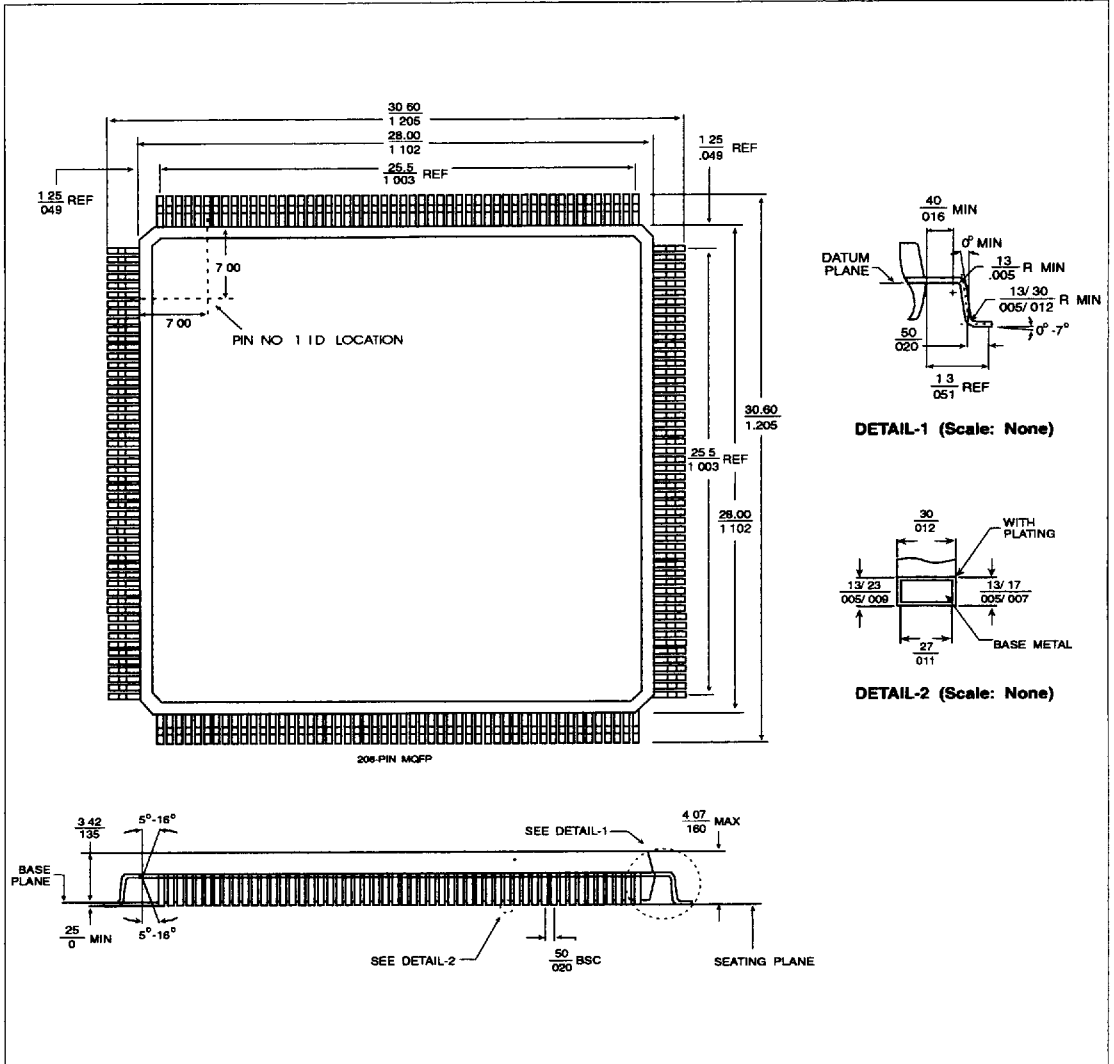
208-PIN MQFP PACKAGE DIMENSIONS
